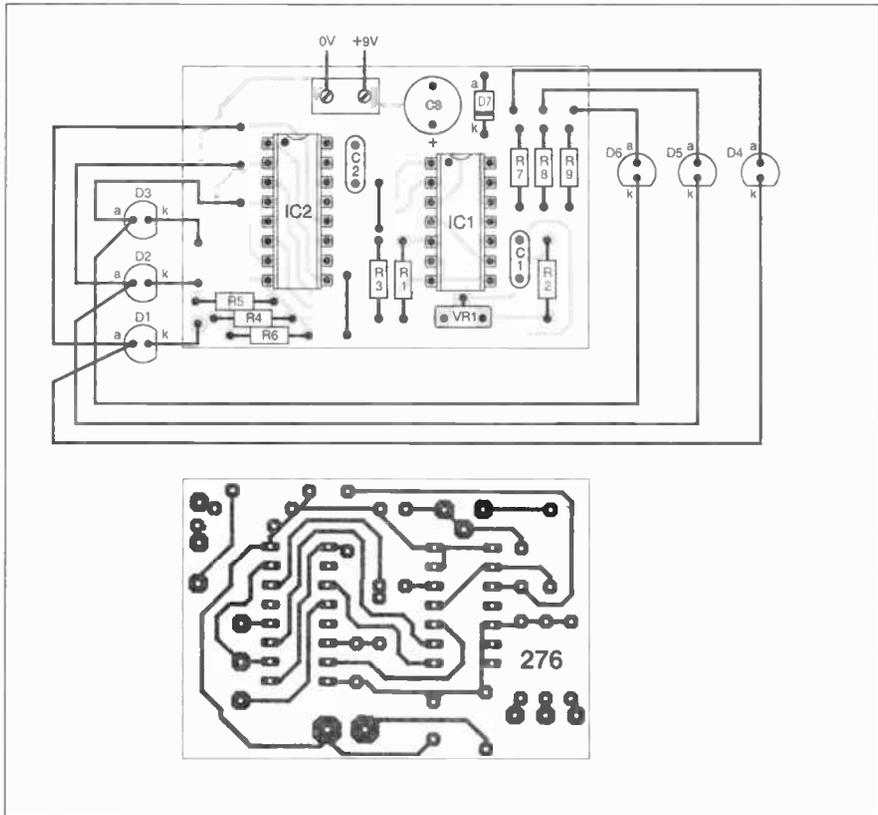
Printed circuit board component layout, interwiring to off-board l.e.d.s and full-size copper foil master.
